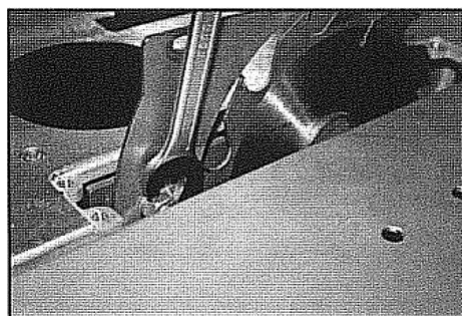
Adjusting the distance between the cutting blade and the saw blade
